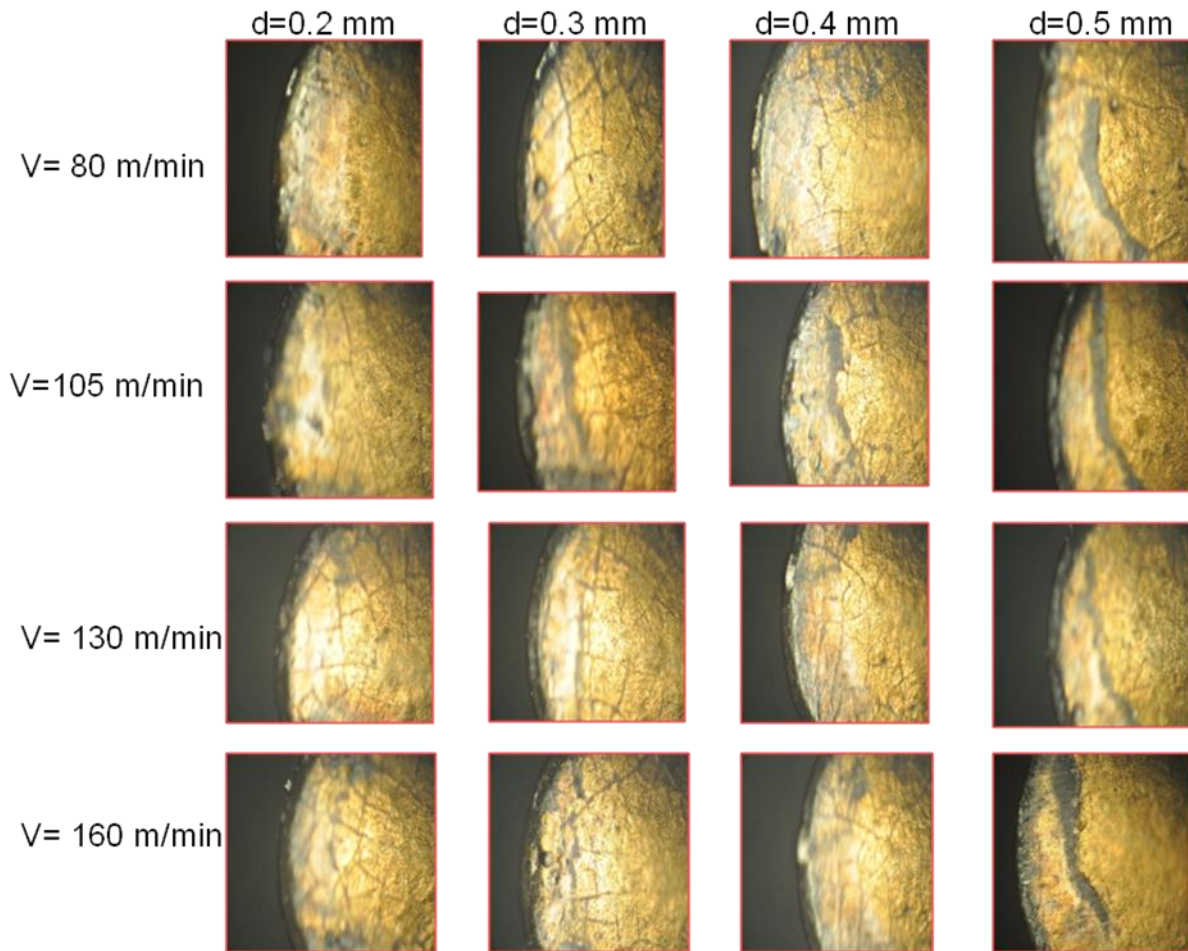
Microscopic views of crater wear for multi layer coated carbide tool
